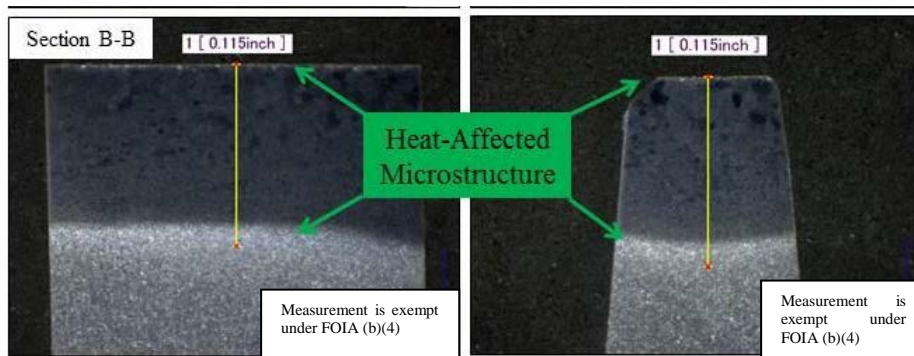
Aft plate seal adjacent to fracture showing heat damage (Tab J-119)
